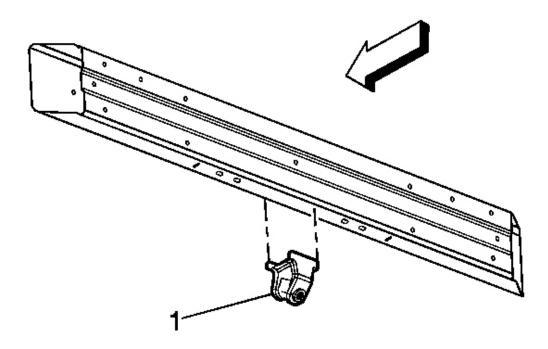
View Of Tow Hook - Rear Courtesy of GENERAL MOTORS CORP.
